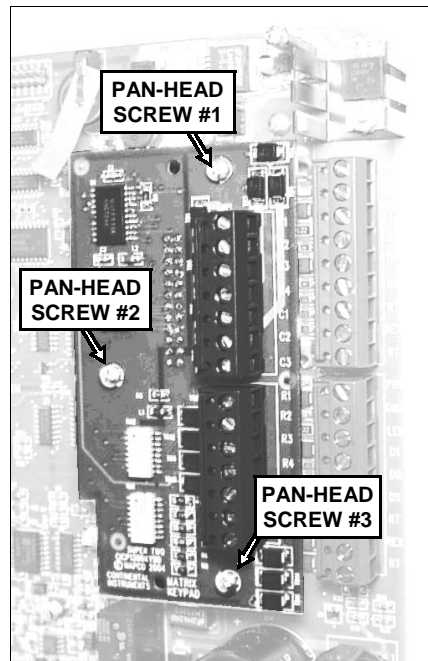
Secure Keypad Board (highlighted) to three standoffs using the screws provided.
